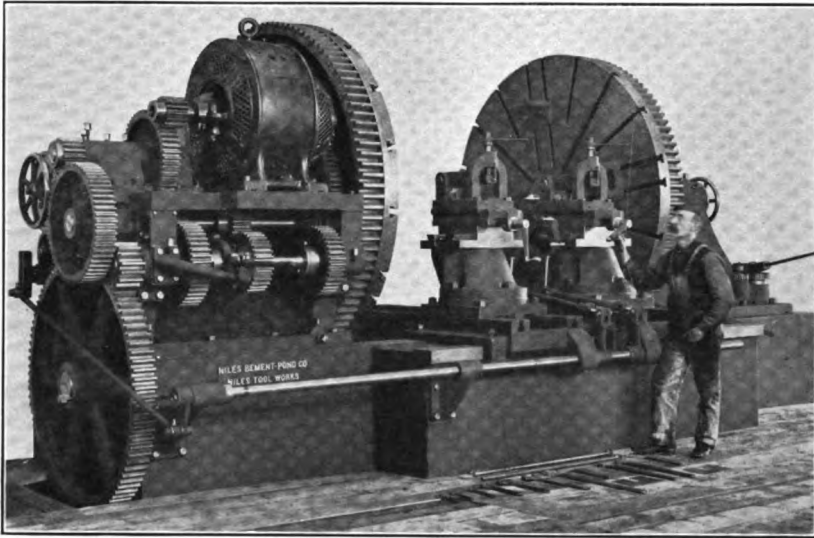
NILES 90-INCH DRIVING-WHEEL LATHE.
